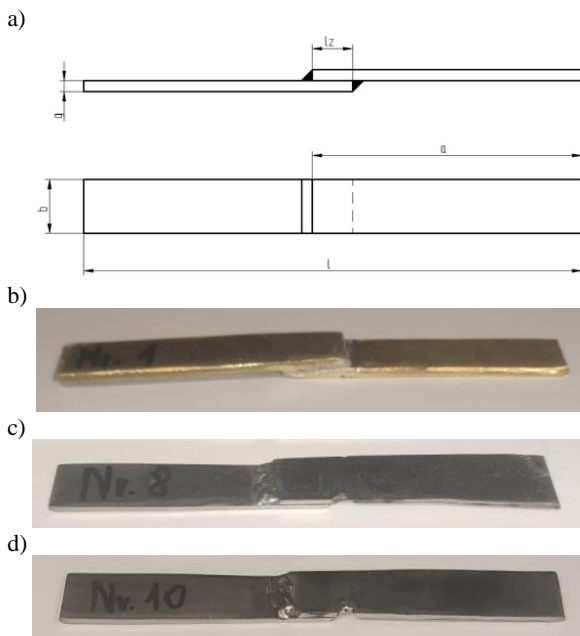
Welded joints: a) diagram of the lap welded joint with double weld used in the tests, b) made of copper alloy, c) made of unalloyed structural steel, d) made of acid-resistant steel
